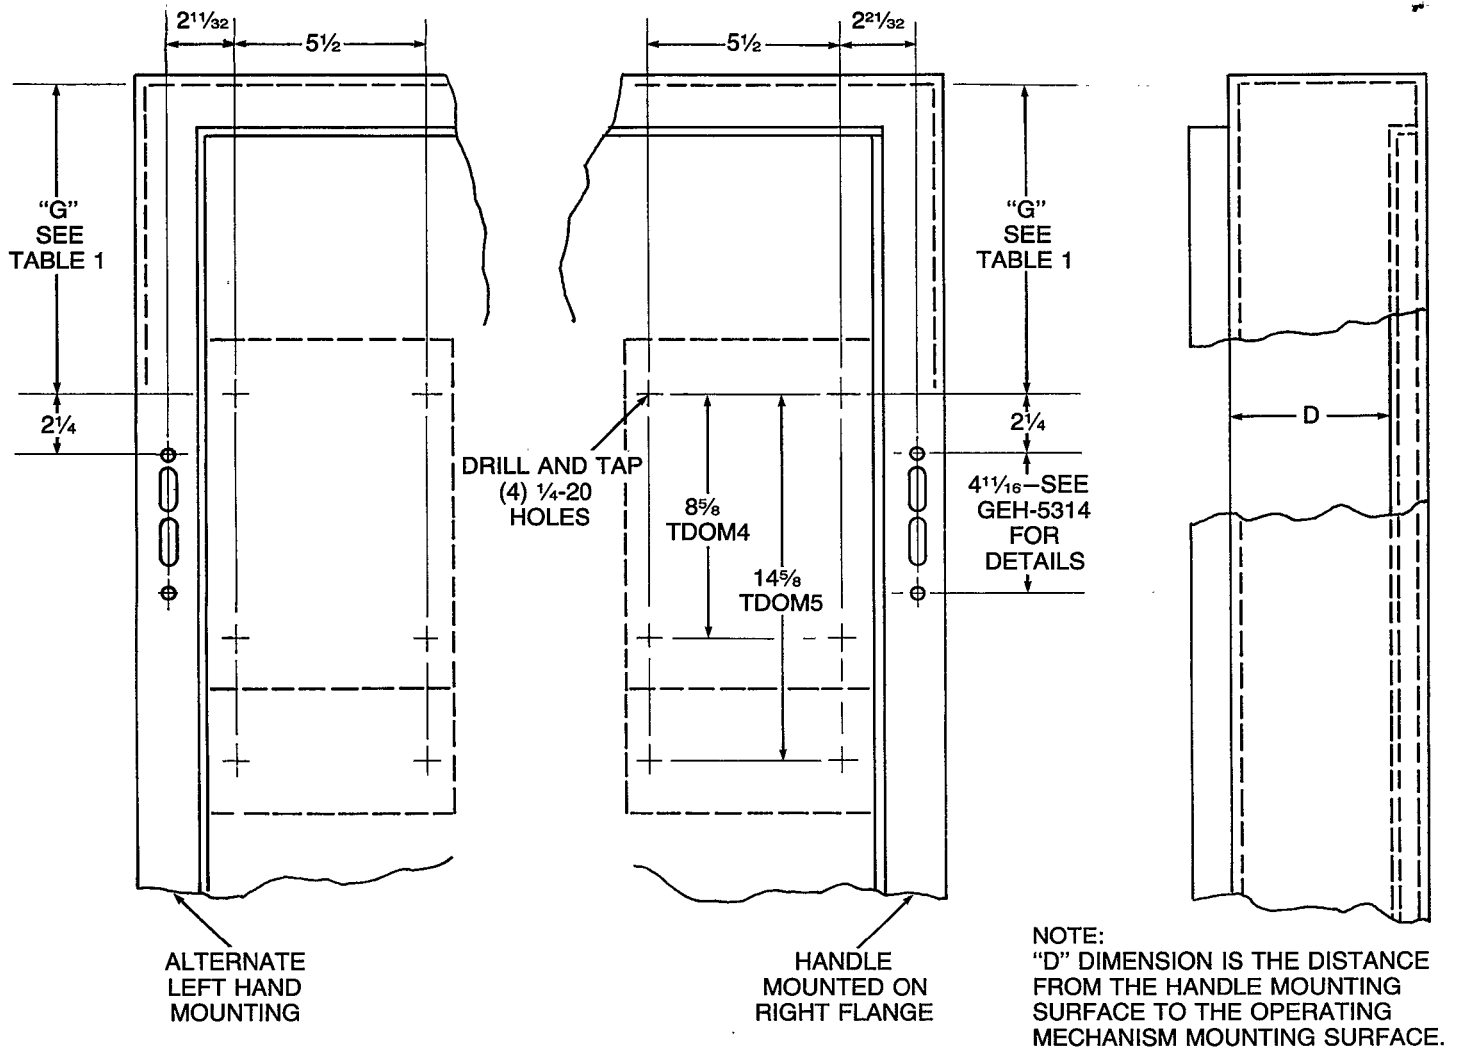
Customer sub-panel layout and drilling for left or right mounting.
